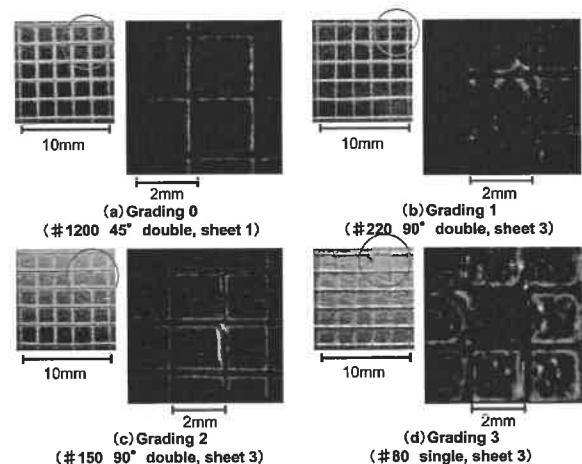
Examples of the metal sheet surfaces after cross cut test.
